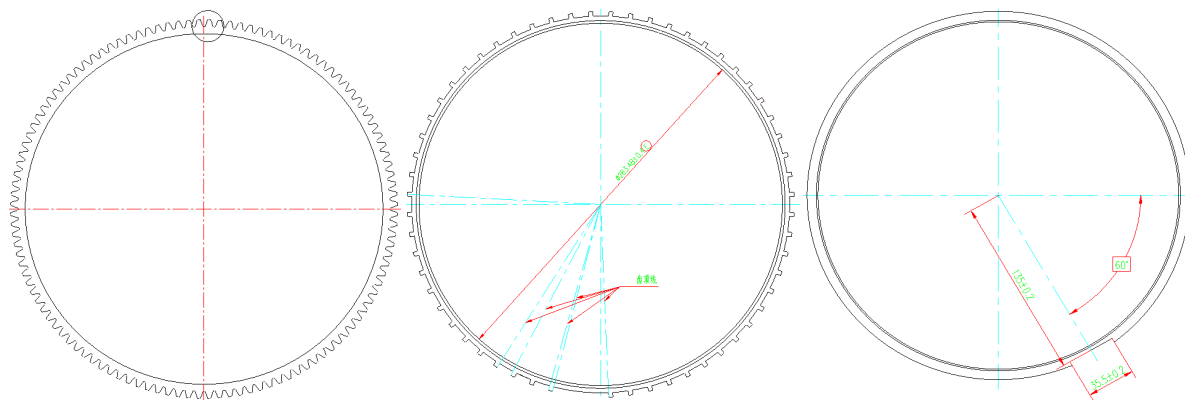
Ring parts (ring gear, signal ring gear, or inertia ring)
